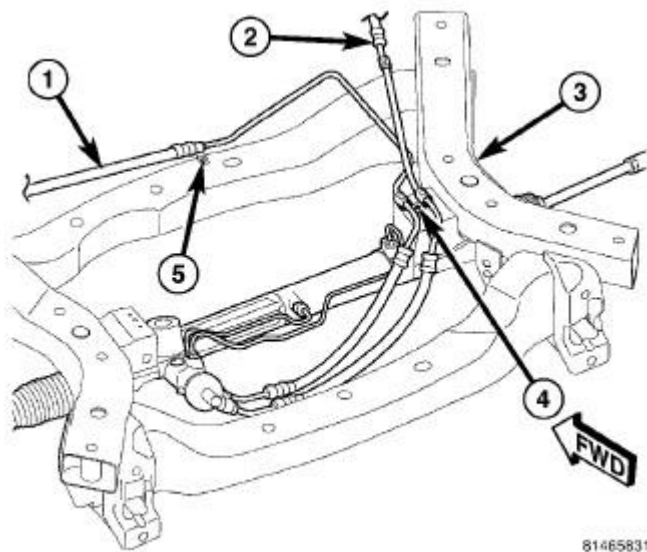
HOSE ROUTING ALONG ENGINE CRADLE
